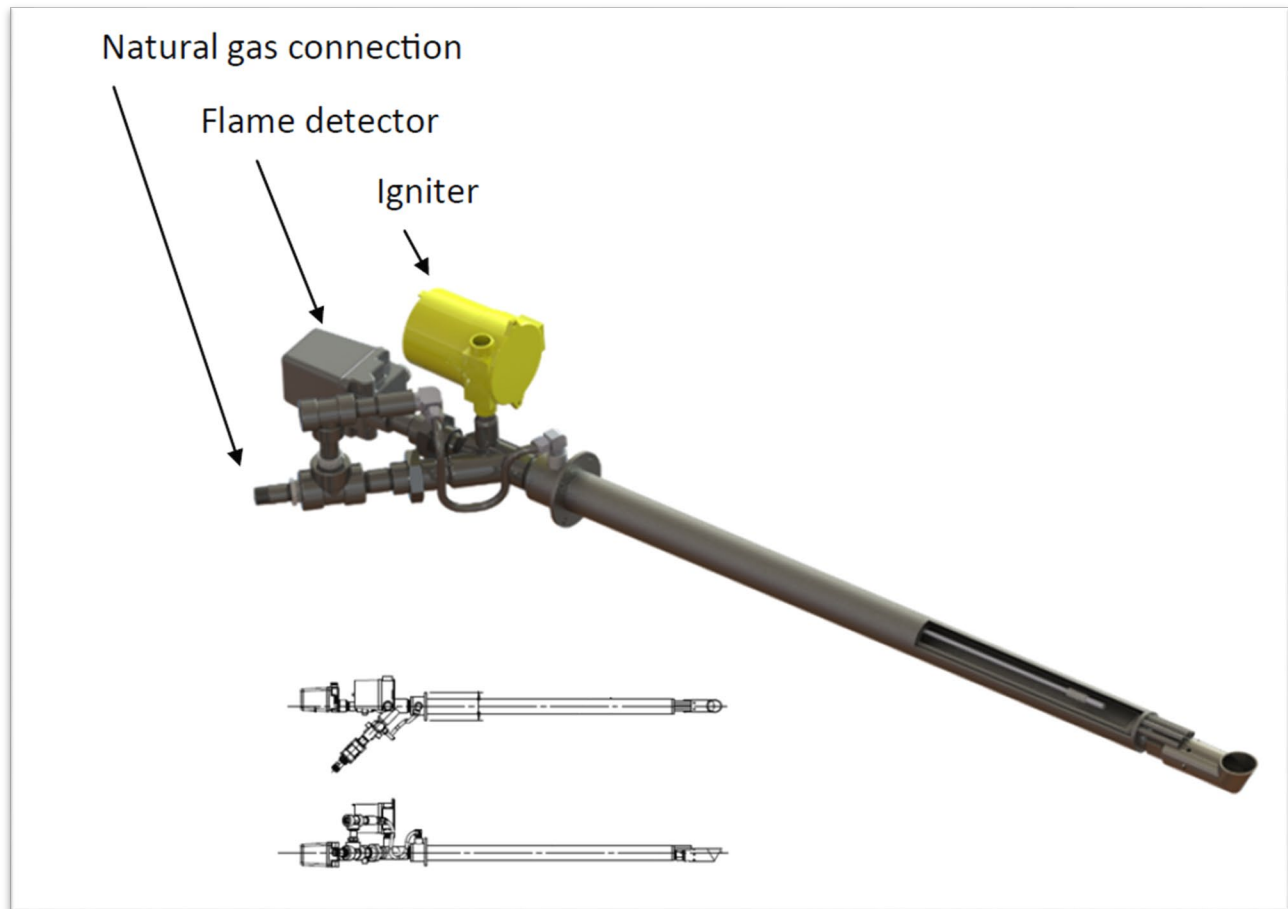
Example of a similar pilot assembly from manufacturer brochure showing a shorter tube, igniter, flame scanner and gas connection.
